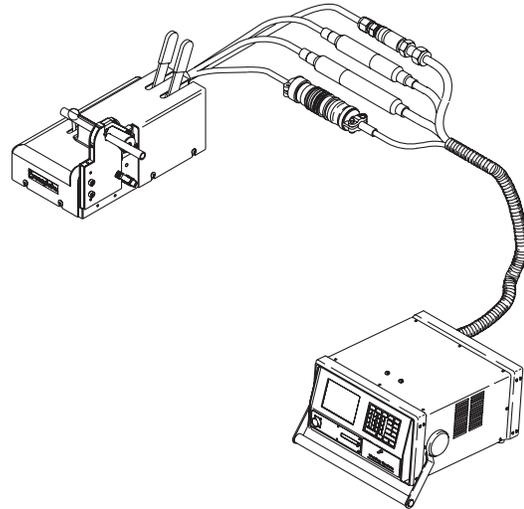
Connecting the Weld Head to the Extension Cable
